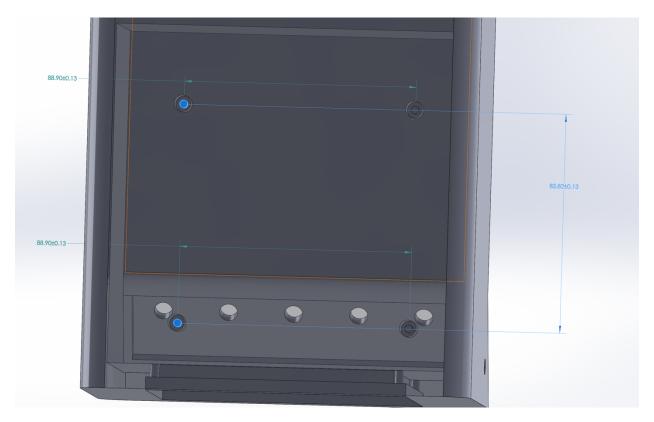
The rear of the enclosure, showing the mounting hole locations for the main circuit PCB.
